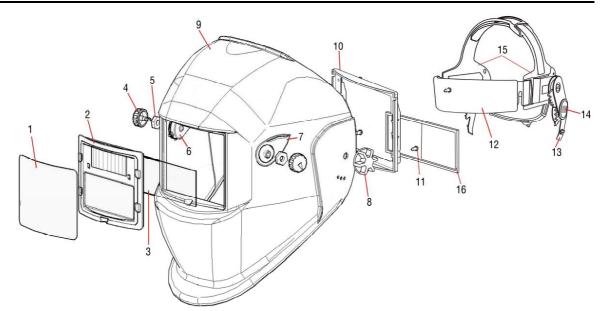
Exploded View of WeldSkill Auto-Darkening Welding Helmet.
